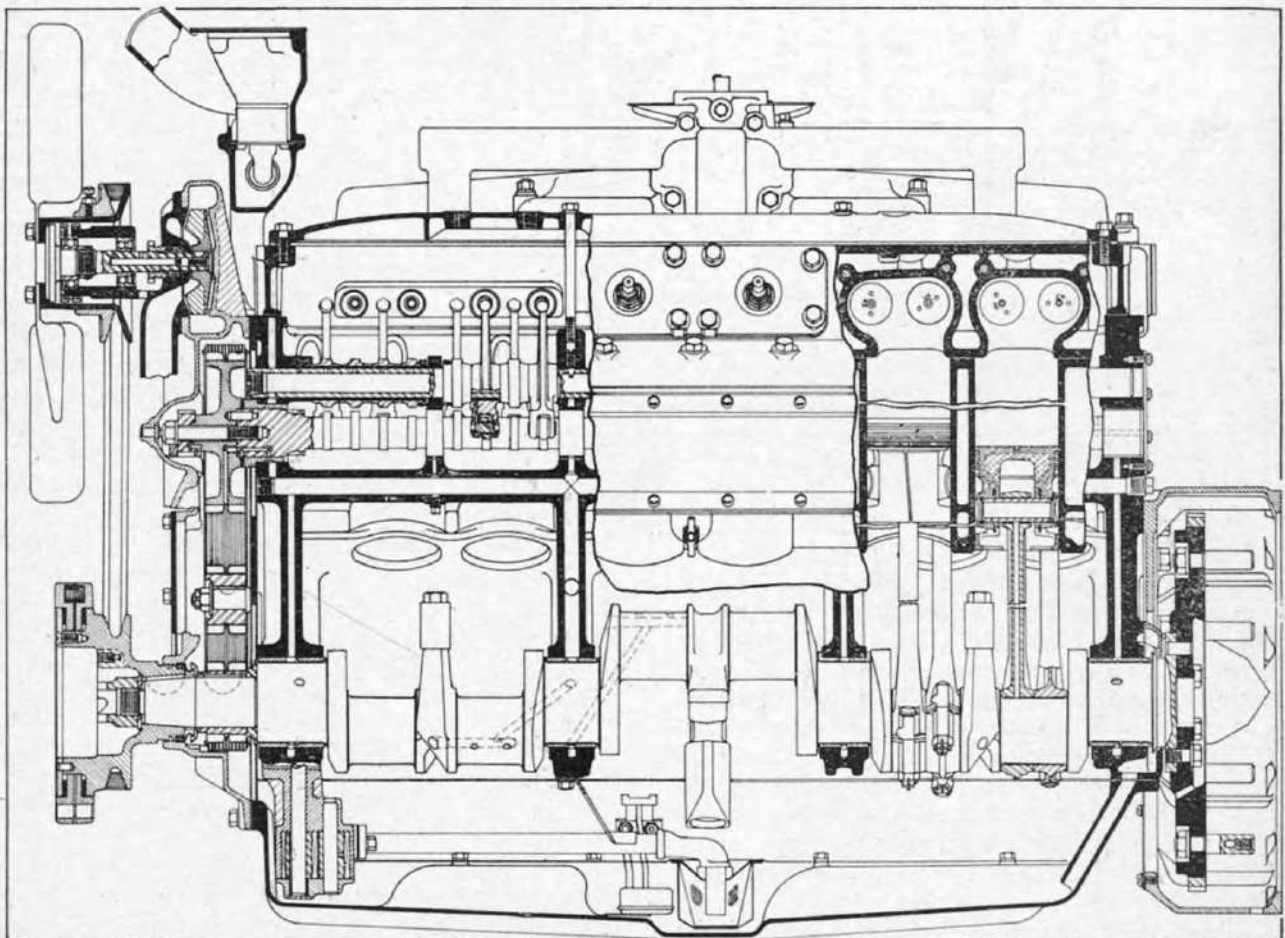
Longitudinal cross section view of the Lycoming model "BB" twelve-cylinder engine, as employed in the Auburn chassis
